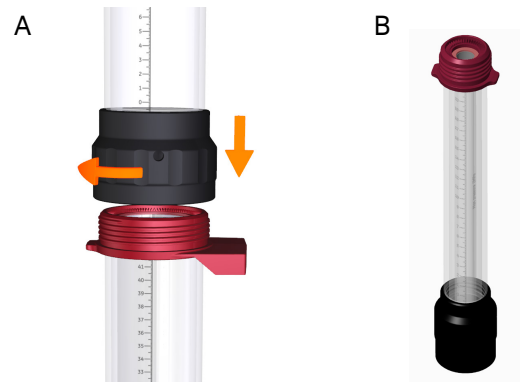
A: Using a packing tube, step 1. B: Packing tube.
